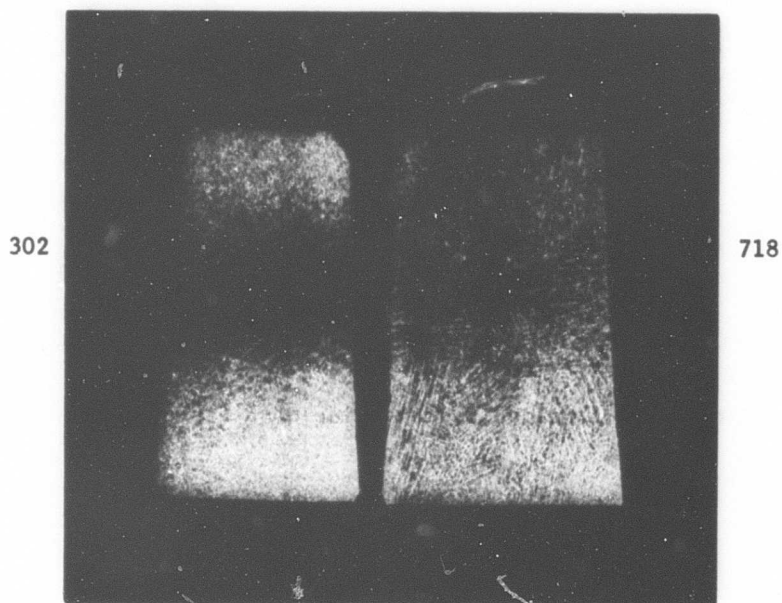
Weld of Mar-M-302 to Inco 718 1/2-Inch-Thick Specimens.
